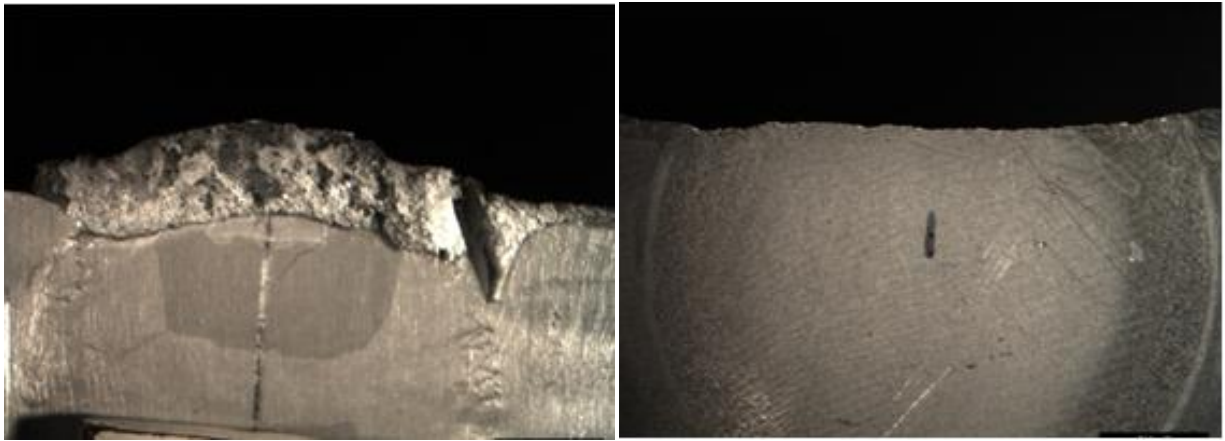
Rough fracture surface (A) ragged fracture with partial plug and (B) ragged fracture through the plug.
